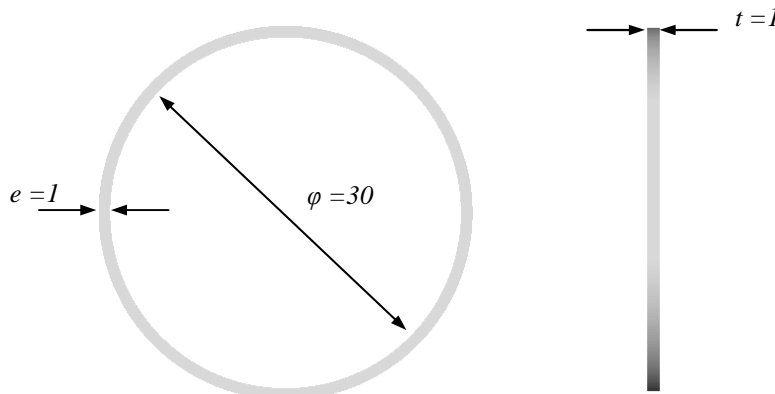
Geometry and dimensions (mm) of the specimen used in the simulations [Rusinek and Zaera 2007].
